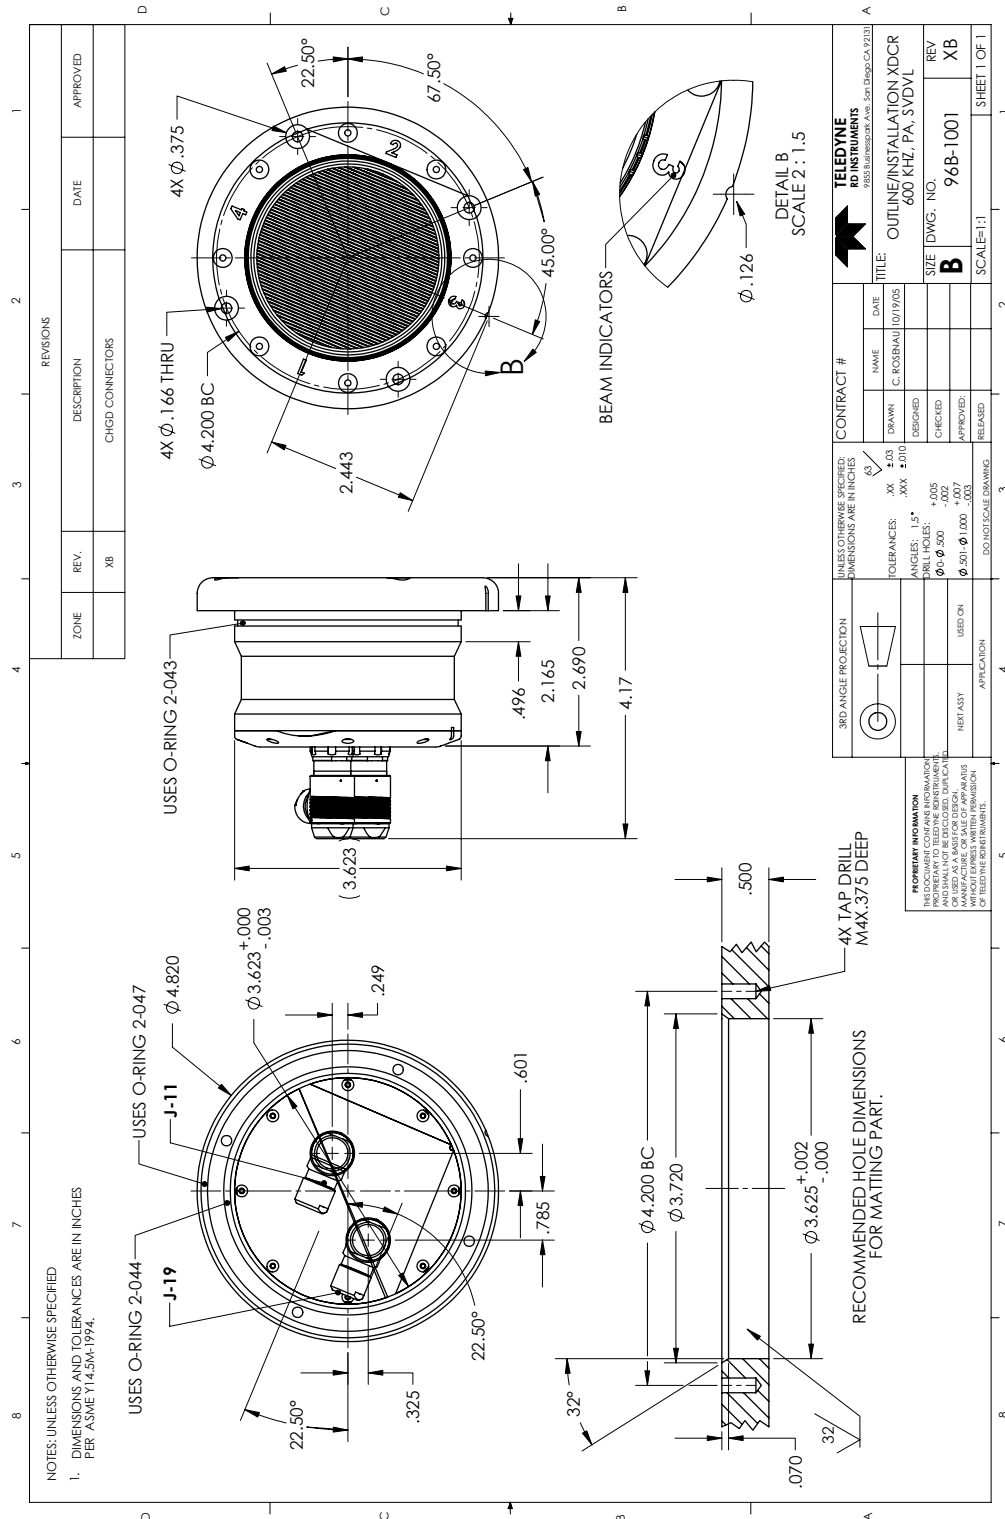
Outline Installation Drawing – 600 kHz Piston ExplorerDVL
